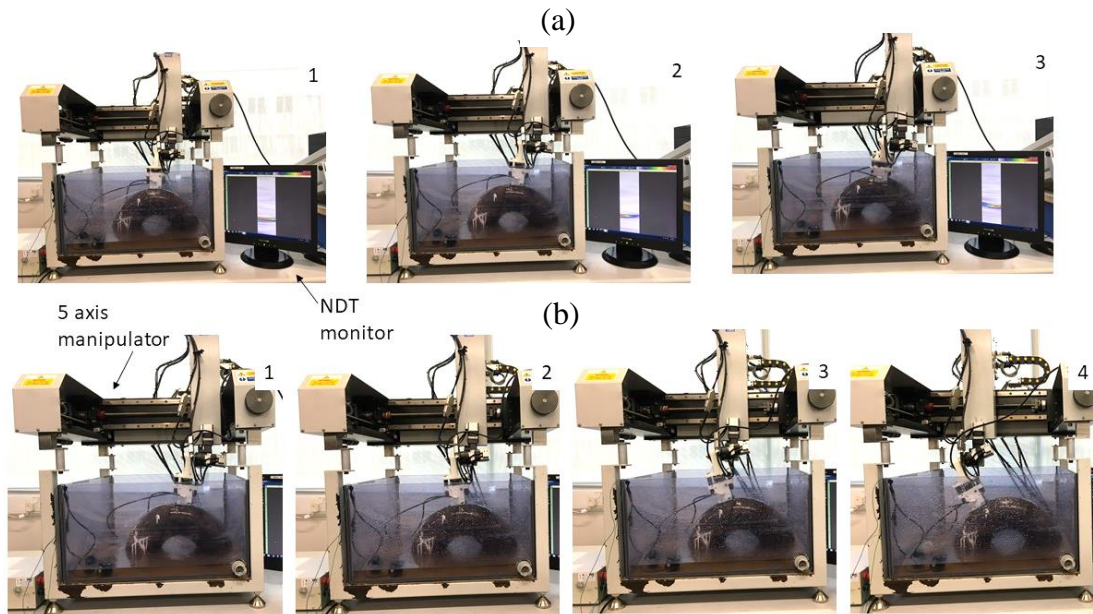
(a) Inspection example – cross-section of the chain; (b) inspection example – across the chain crown surface
